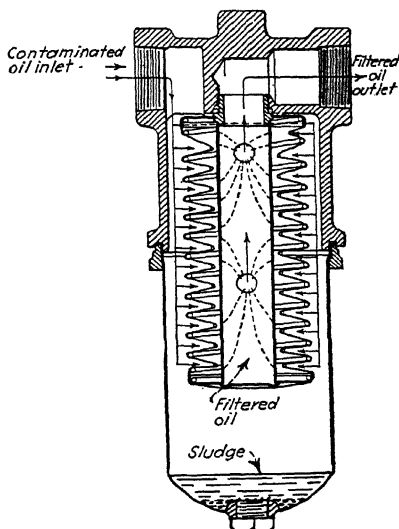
An extended area is obtained in this filter by winding the fabric filtering cloth over two helical springs of different diameters.
